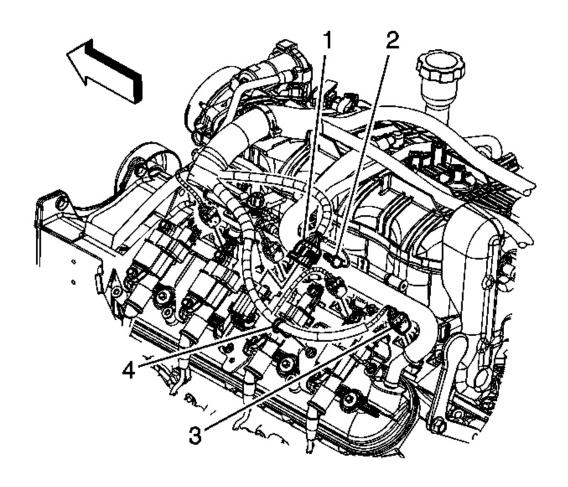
Valve Rocker Arm Cover Replacement - Left Side Courtesy of GENERAL MOTORS CORP.
